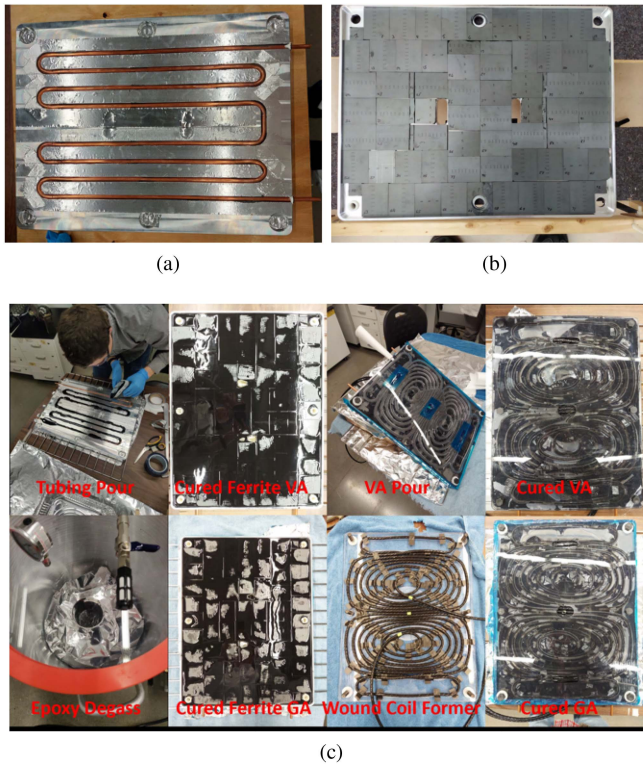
Construction of the Gen. 1 120 kW coil assemblies. (a) Bent tubing pressed and bonded into the channels in the aluminum enclosure. (b) Ferrite layout and numbering of the Gen. 1 coil assembly with a similar layout used in the other coil. (c) Multiple images of tubing, ferrite and coil encapsulation, degassing of the epoxy, wound coil former, and front sides of the finished Gen. 1 coils.
